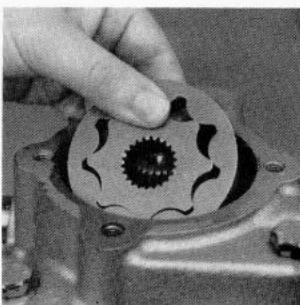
Remove Gerotor Spacer Check Ball
